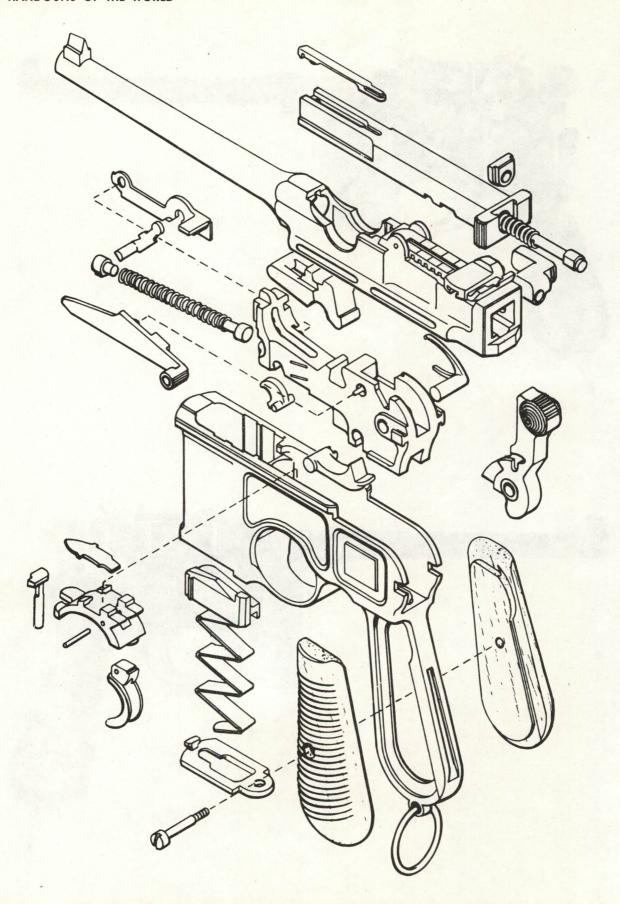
An exploded view of the cone-hammer-type M/96 pistol. Note especially the method of retaining the firing pin, and the long extractor. (*Bravermann*)
